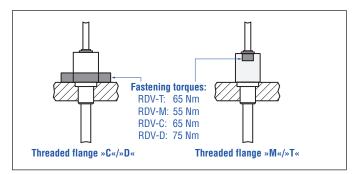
Mounting example of threaded flange »C«/»D«, »M«/»T«
